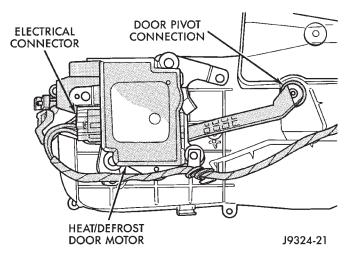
Heat/Defrost - Panel/Defrost Door Motor Remove/Install
